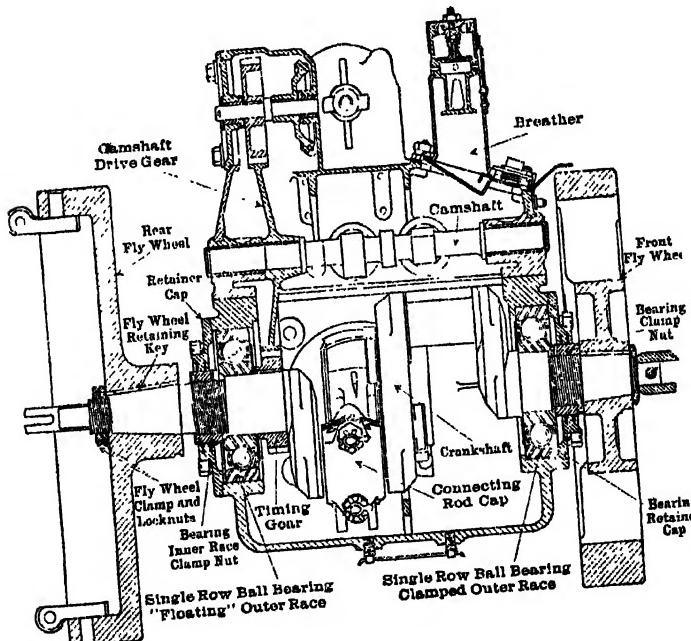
Section of Autocar Motor Crankcase Showing Ball Bearing Crankshaft.
